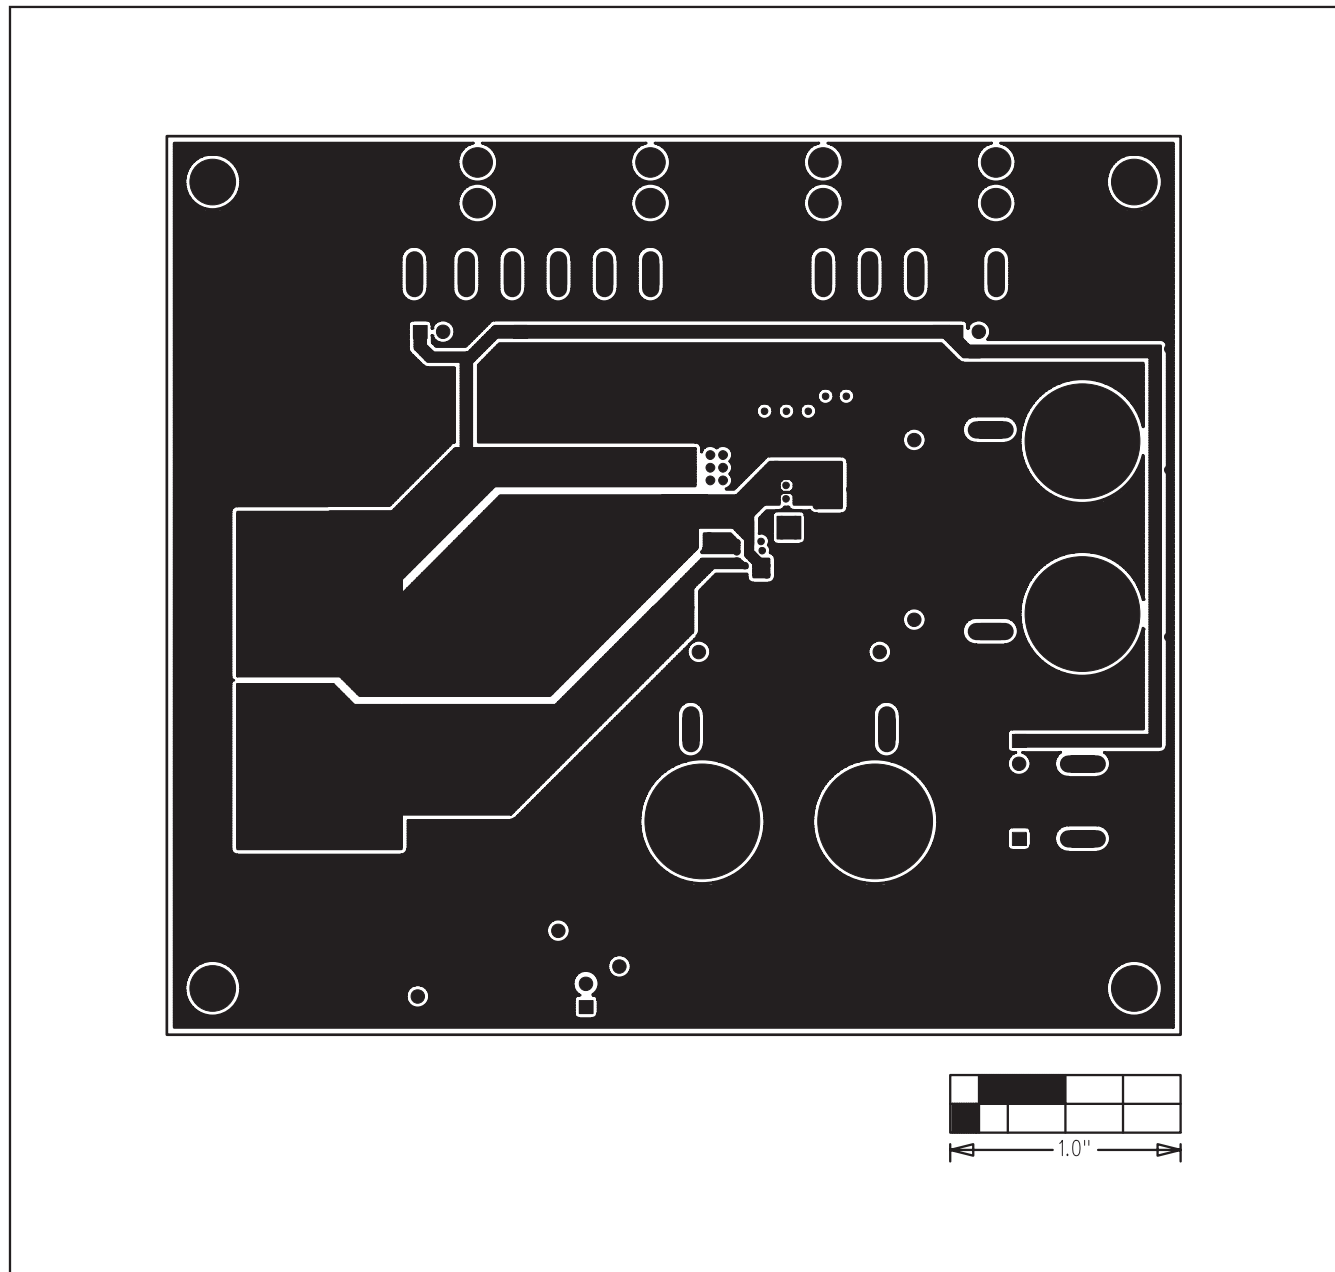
MAX9791A EV Kit PCB Layout—Layer 3
